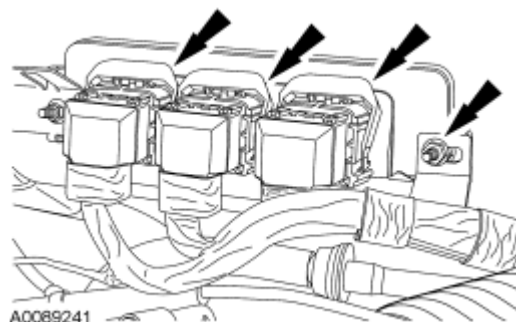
Locating Powertrain Control Module (PCM) Electrical Connectors
